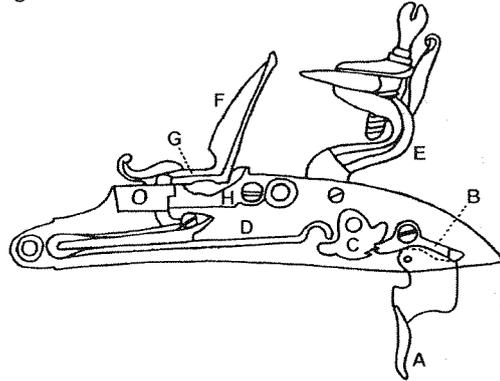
The mechanism of the flint-lock. On pressing the trigger, A, the sear, B, is released from the tumbler, C, which rotates under the action of the spring, D. On the same shaft as the tumbler is the cock, E. This carries the flint which strikes the steel, F, raising the pan cover, G, attached to it. The sparks fall in the pan, H. (Reproduced from Singer, C., *A History of Technology*, Vol. 3, p354.)
